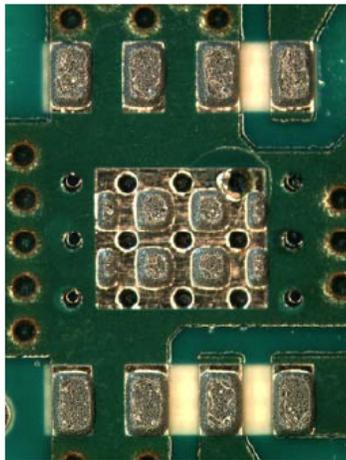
Assessment of New Case Style unit mounted on Original PCB Land Pattern
